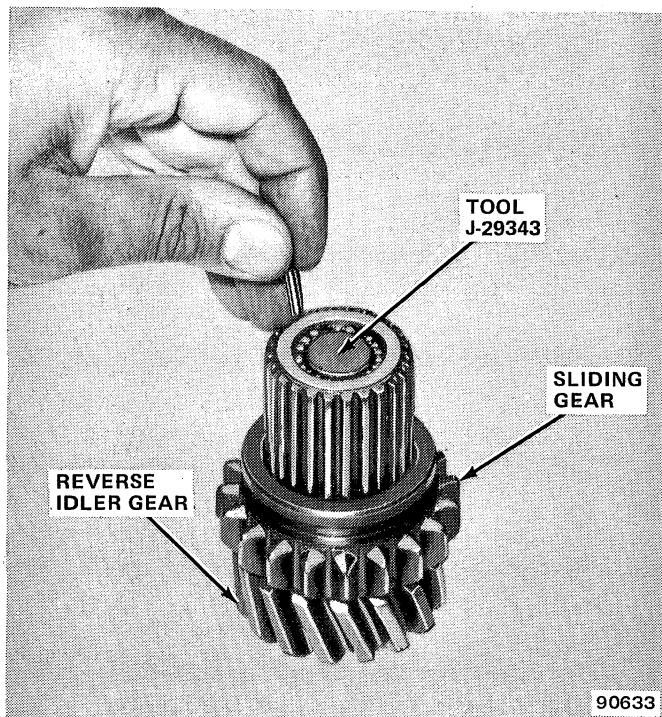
B-61 Reverse Idler Gear Needle Bearing Installation
